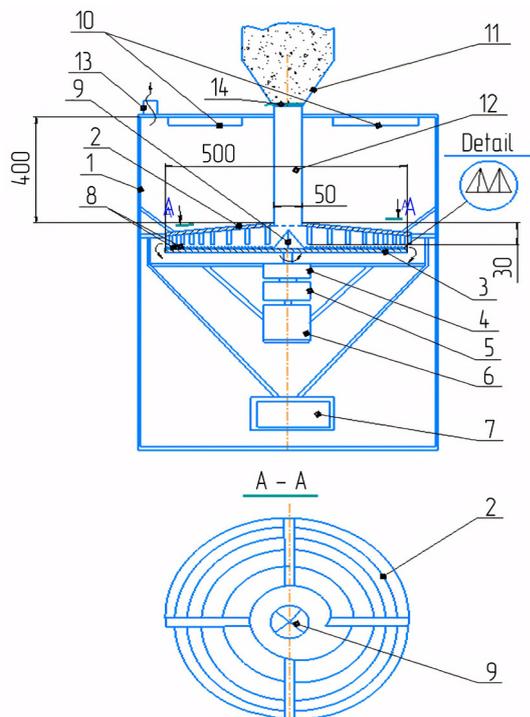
Experimental unit for microwave processing of sunflower seeds before pressing: 1 – housing; 2 – fixed guide spiral; 3 – rotating disk; 4 – bearing with housing; 5 – gearbox; 6 – electric motor; 7 – discharge hopper; 8 – rough disk surface; 9 – conical product distributor; 10 – magnetrons for emitting microwaves; 11 – loading hopper; 12 – pipe for feeding the feedstock onto the disk surface; 13 – pipe with a check valve; 14 – gate valve
